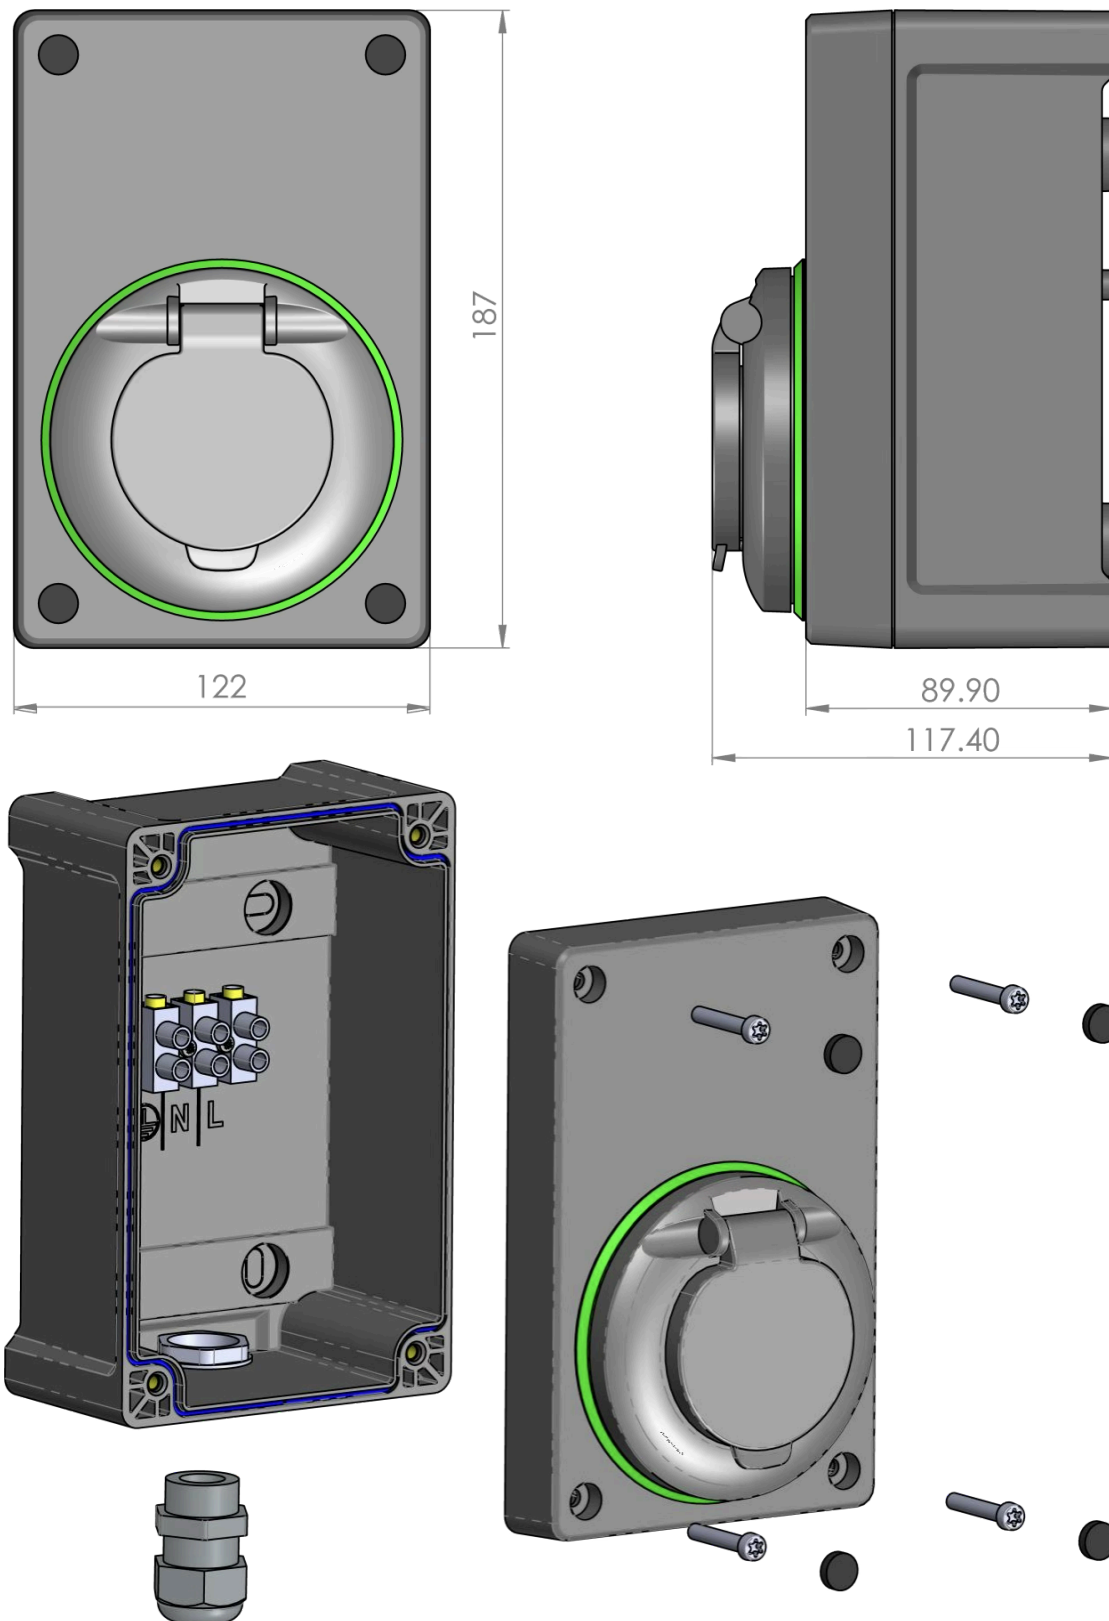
Dimensions and disassembled view of socketed EVNET (ELNexus 7 kW Series)
